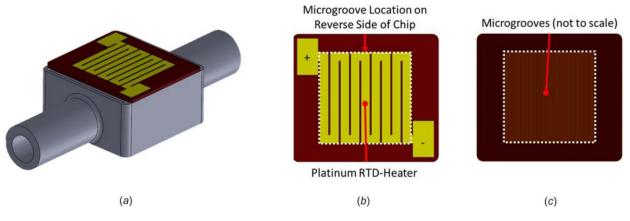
(a) Bonded FEEDS header manifold, (b) thin-film platinum RTD heater, and (c) DRIE embedded heat sink
